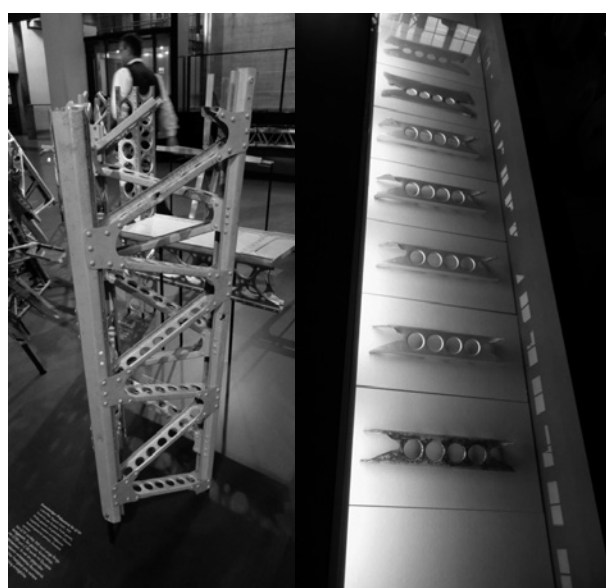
Frameworks of Zeppelin Airship jointed with rivets and roll forming process of Duralumin sheets exhibited in Zeppelin Museum Friedrichshafen.
